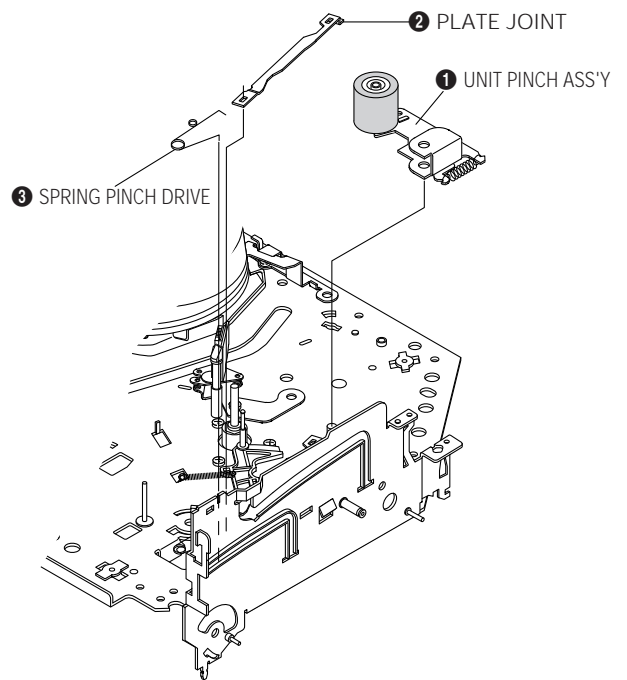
Unit Pinch Ass'y, Plate Joint, Spring Pinch Drive Removal
